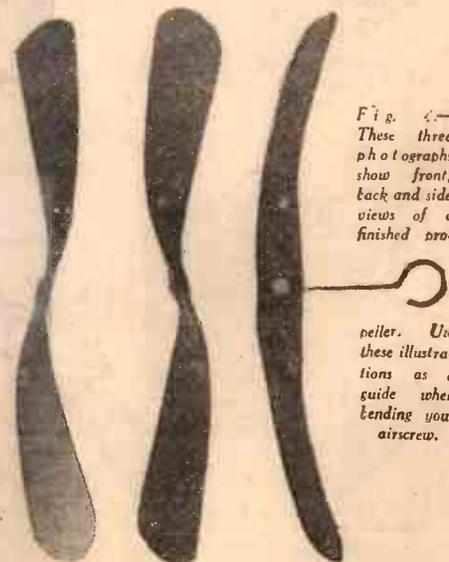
These three photographs show front, back and side views of a finished pro-
